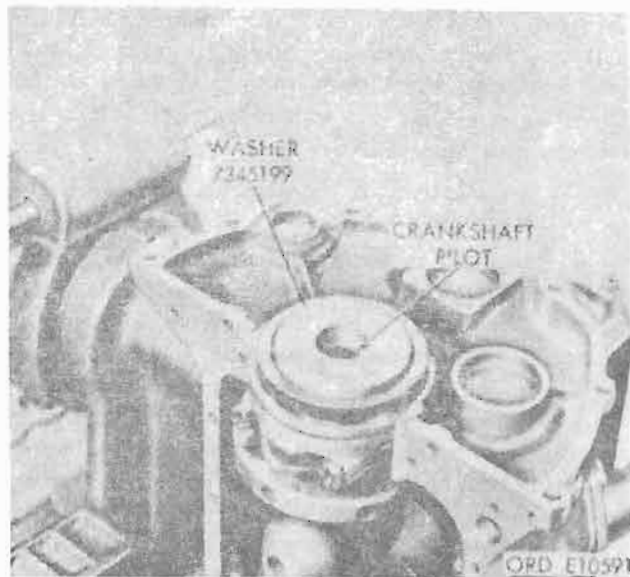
Installation of replacer tool washer and rear seal on crankshaft.
